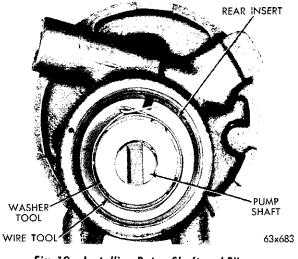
Installing Rotor, Shaft and Slippers Assembly
